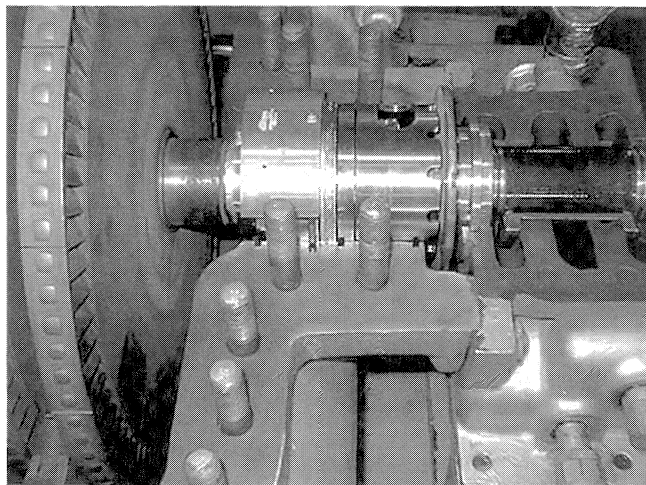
Internally Mounted Steam Seal Installed in Turbine Case.
